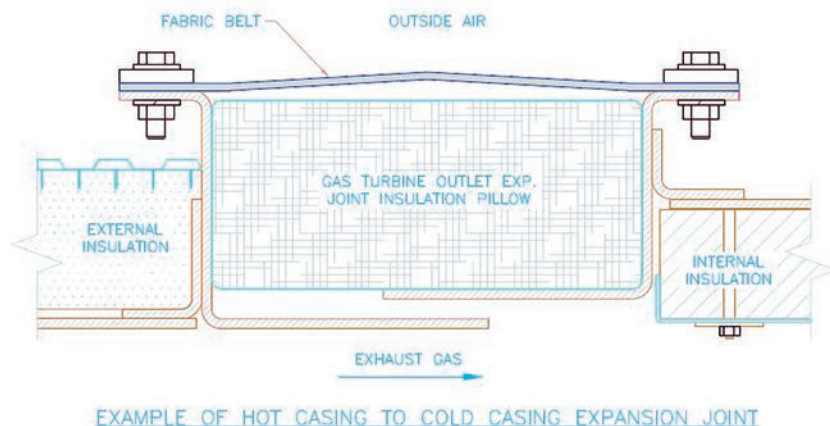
Hot-to-cold expansion joints often cause hot spot problems
